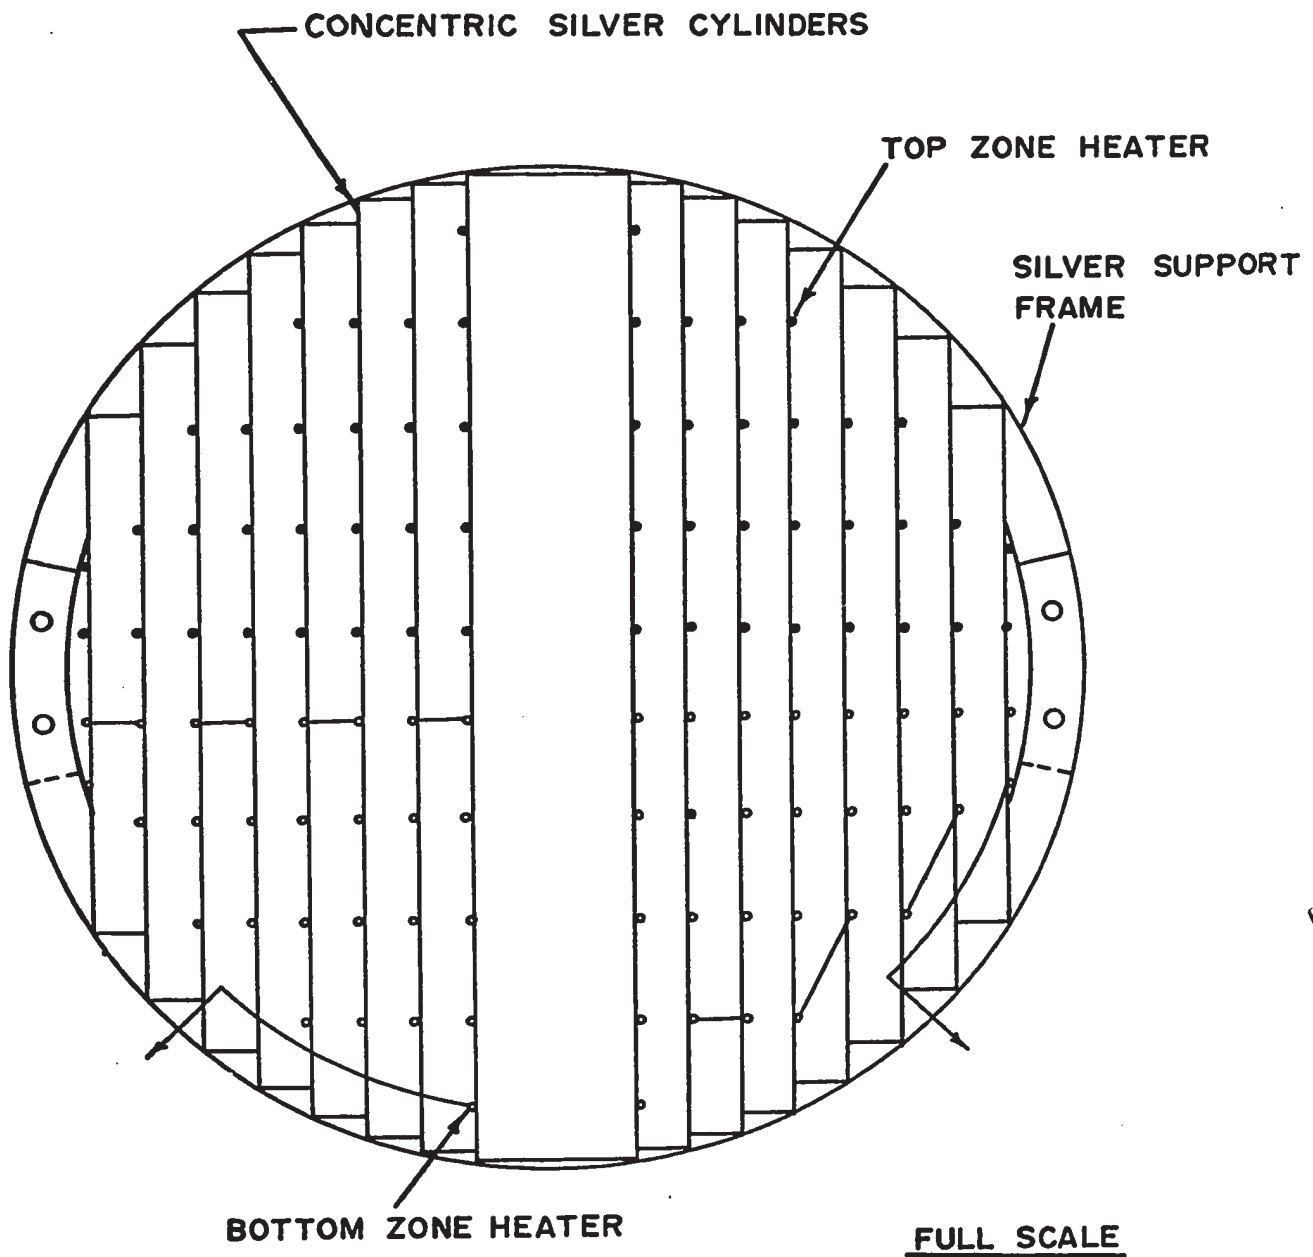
C ASSEMBLY DRAWING OF SILVER HEAT DIFFUSION SYSTEM
